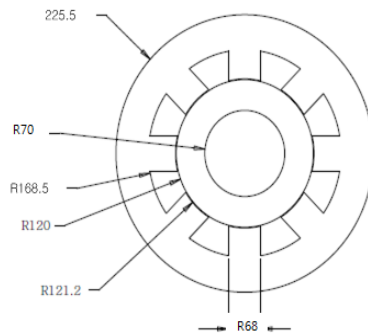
8-pole electro-magnetic bearing dimensions.
